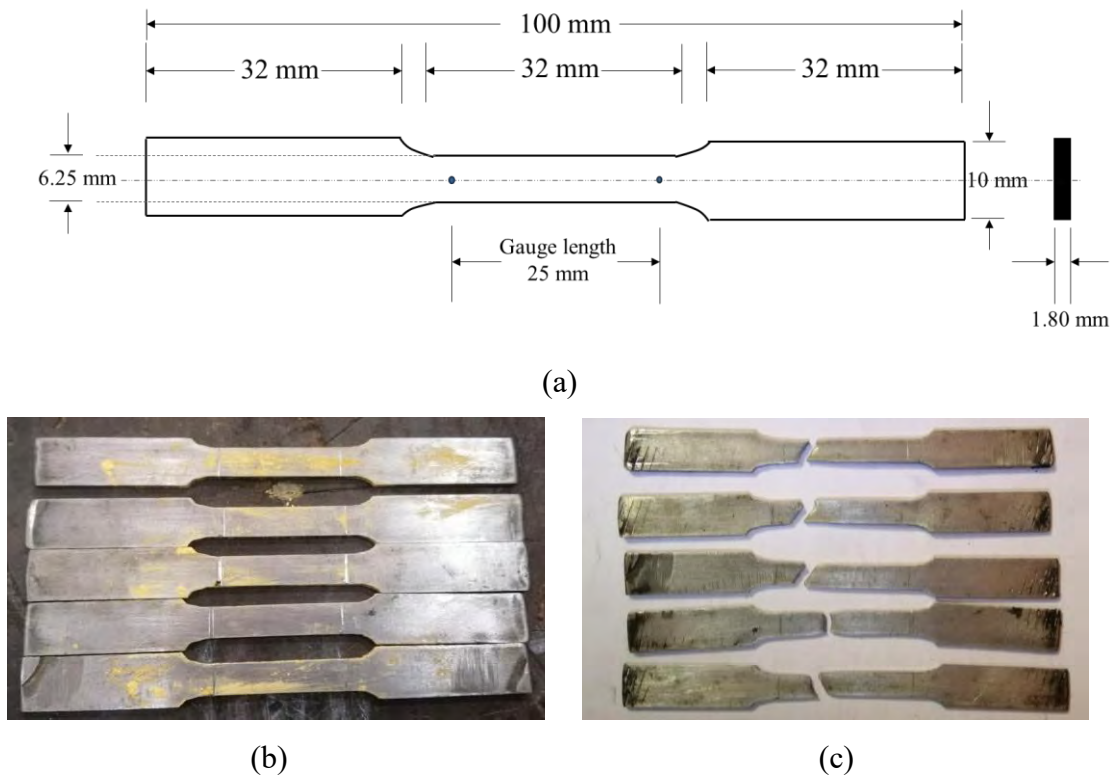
Longitudinal flat tension test (a) specimen dimension, (b) prepared specimens before testing (c) specimens after testing.
